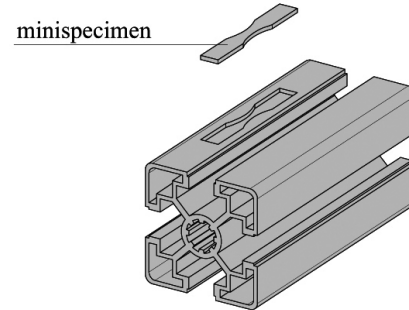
A method of collecting a minispecimen from a thin-walled aluminium shaped section treated as a real structural component [14]
